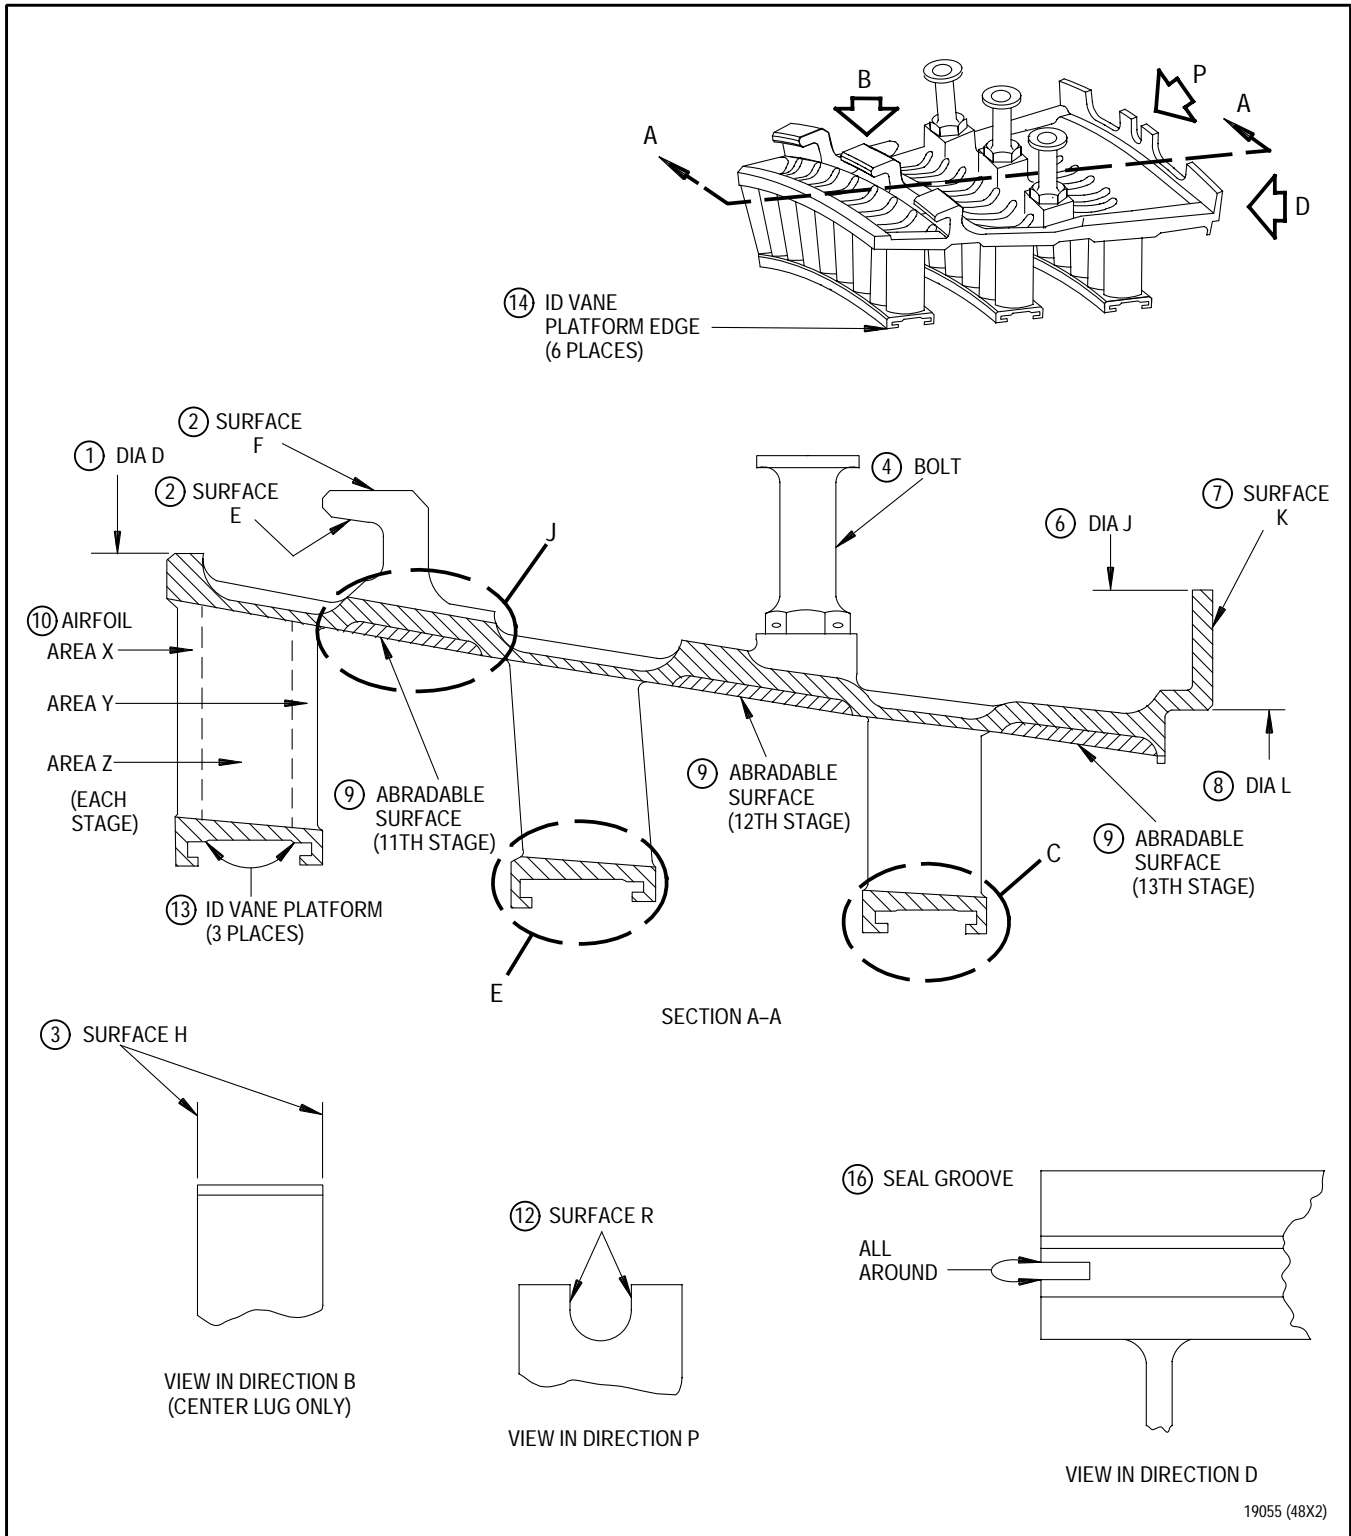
Tenth Through Twelfth Stage Compressor Stator Segment Assembly - Inspection (Sheet 1 of 2)
